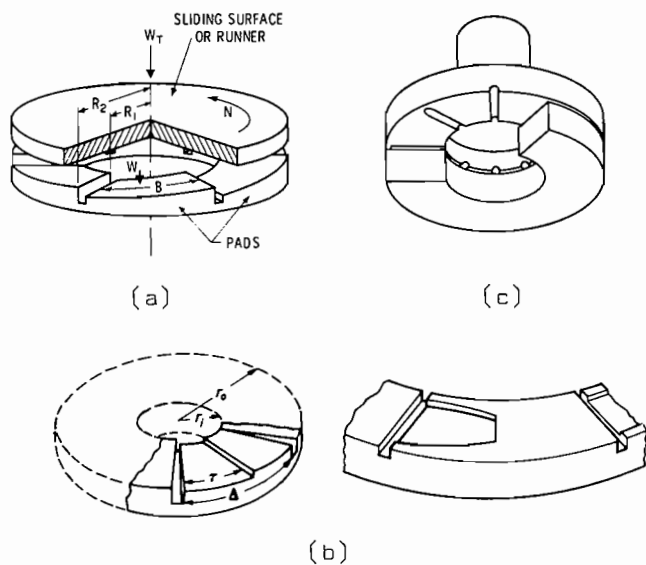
Fixed Type Thrust Bearings; (a) Tapered Land, (b) Step, (c) Parallel Face.
